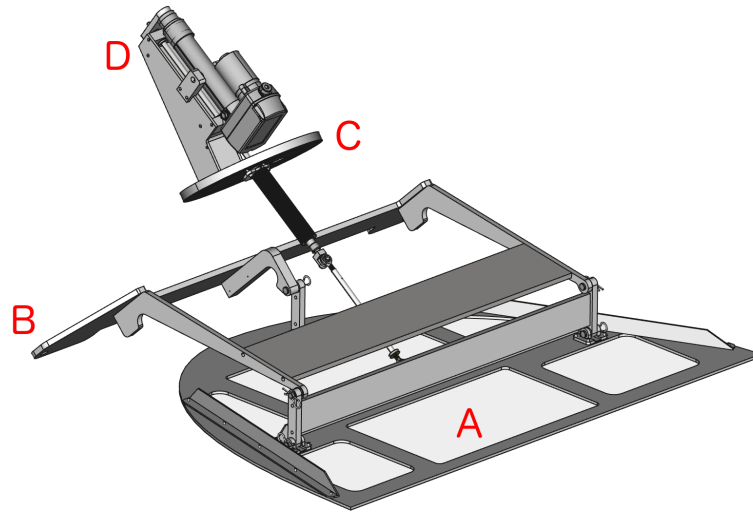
Rendering of the giant cleaner. A: Polyethylene surface, B: Mounting bracket, C: Vacuum break, D: Linear actuator
